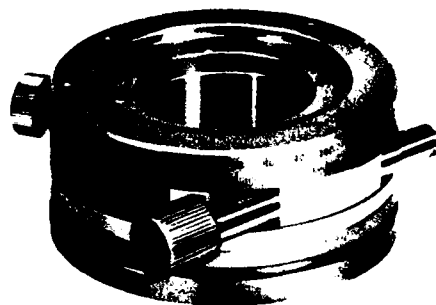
Opened Gyroscope Fixture Showing Heater Ports
